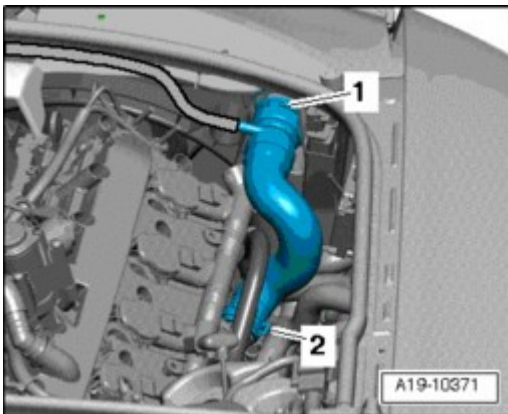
Disconnecting Bottom Coolant Hose At Oil Cooler To Drain Off Remaining Coolant
